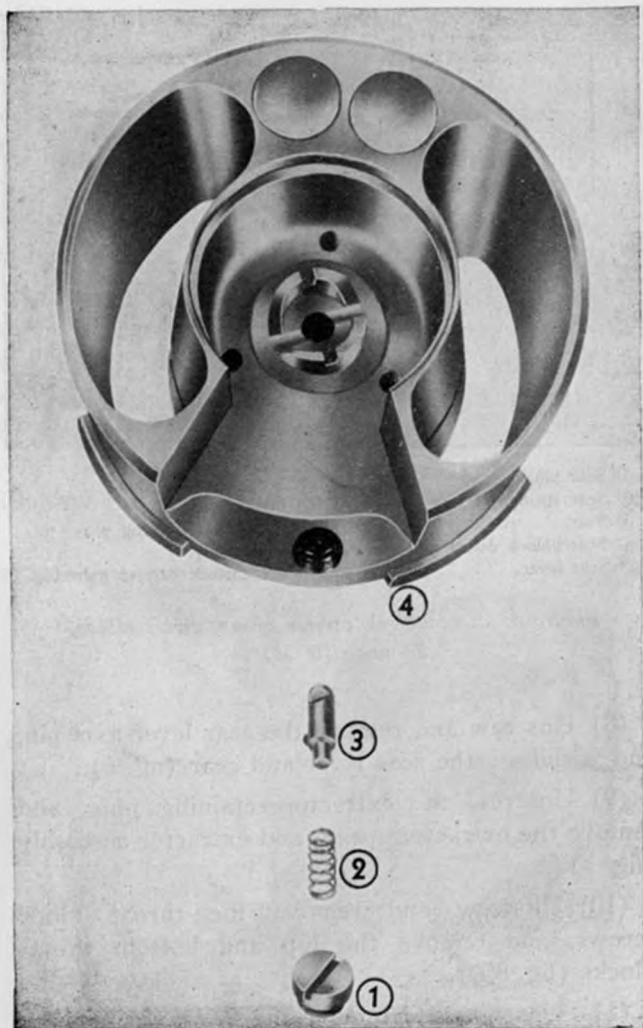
Breechblock carrier group, disassembled, 57-mm rifle M18.
